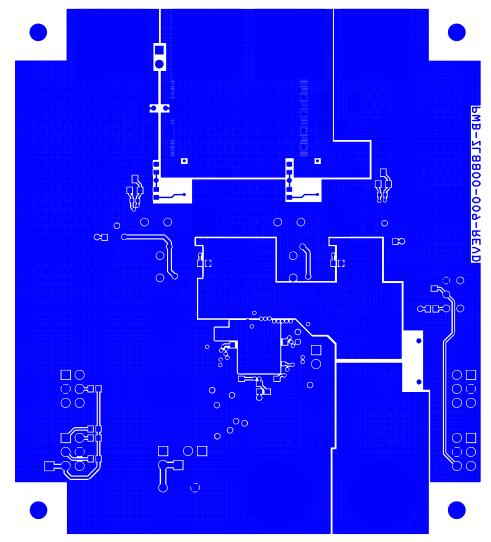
PCB - BOTTOM LAYER (TOP VIEW)
